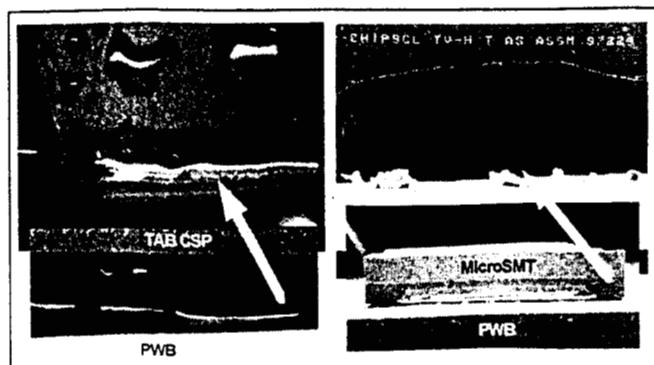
Good Solder Joint Quality of a Grid CSP and Poor Solder Joint Quality of Low I/O Wafer Level
